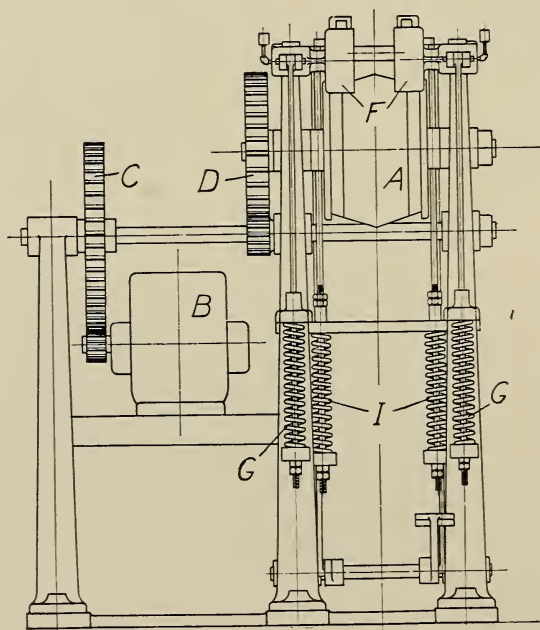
THE JOHNSTON BEAD TRIMMER.
